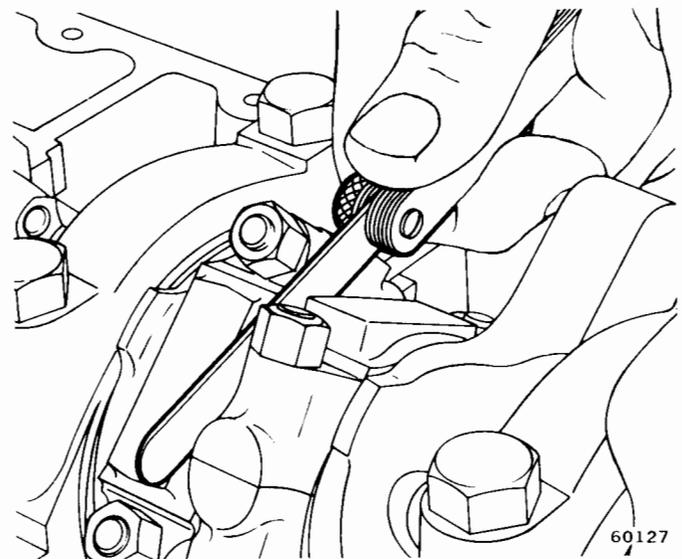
B-32 Connecting Rod Side Clearance Measurement
